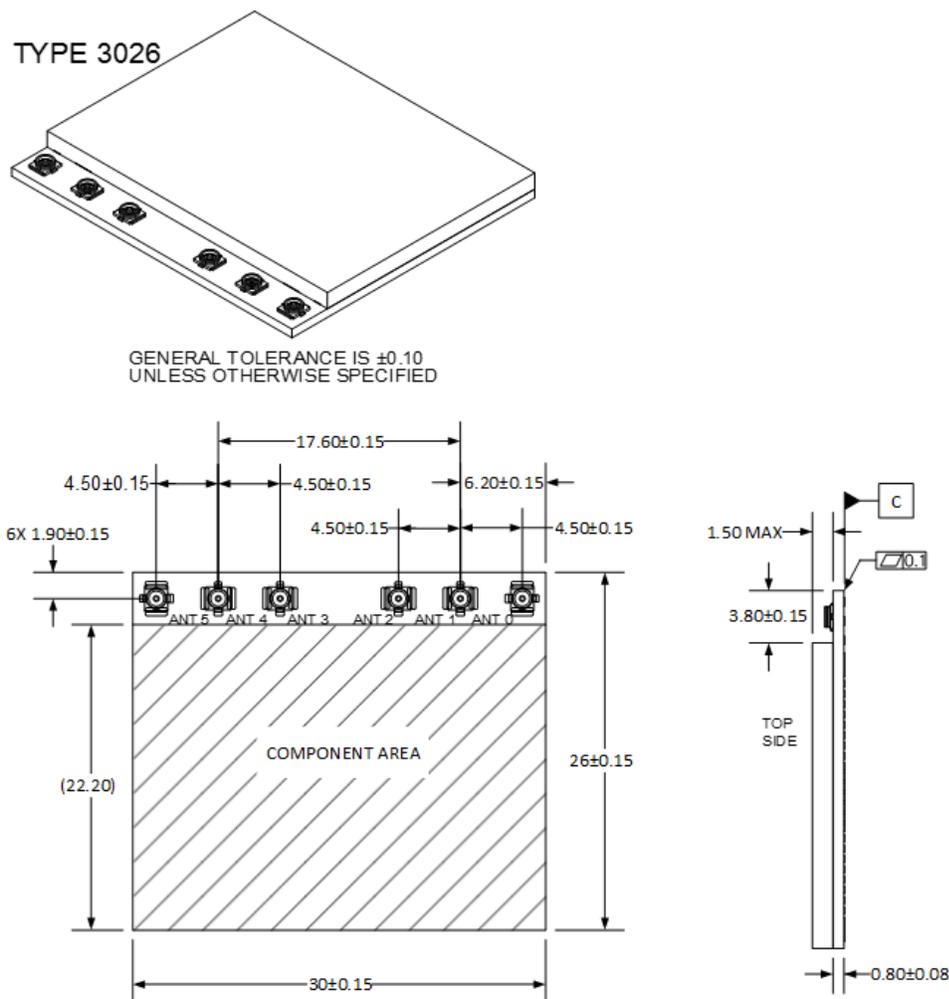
M.2 Type 3026-S3 Mechanical Outline Drawing Example
